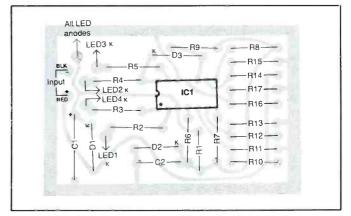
Wiring diagram for pc board. Use this as a rough guide to component placement when wiring the project on perforated board.
